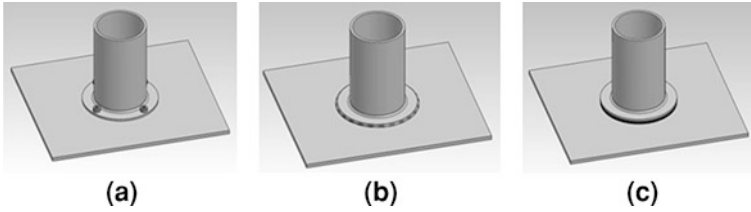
Conventional technologies for joining tubes to sheet panels by means of a mechanical fixing with fasteners, b welding and c structural adhesive bonding
